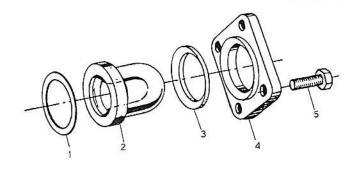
Shaft Seal and Bearing Head -Y-53 Type
